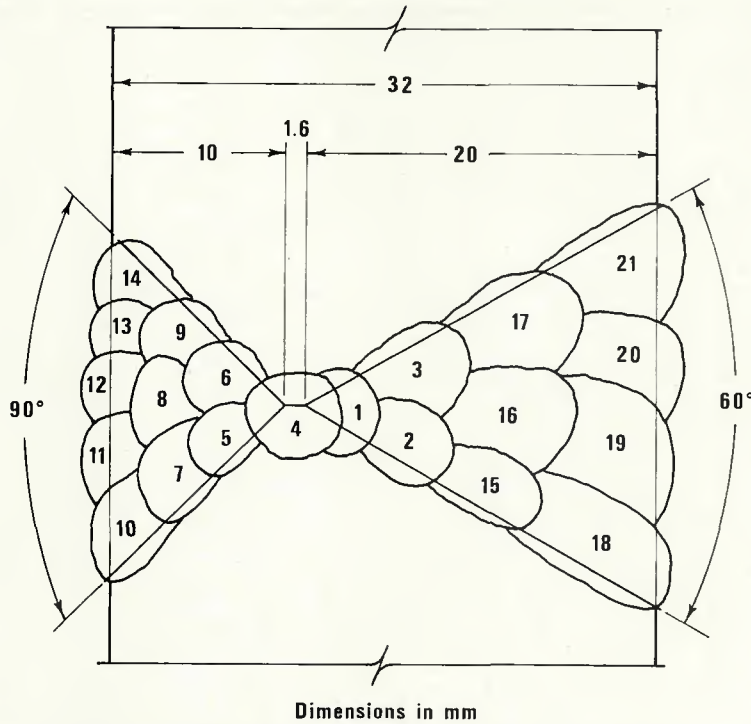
Weld joint preparation and welding sequence (25.4 mm = 1 in.)
